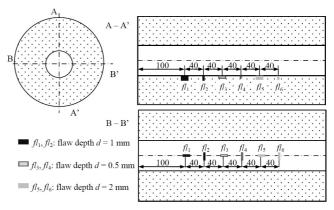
Cross-section view with dimension of the hollow axle sample utilized in the experiments.
